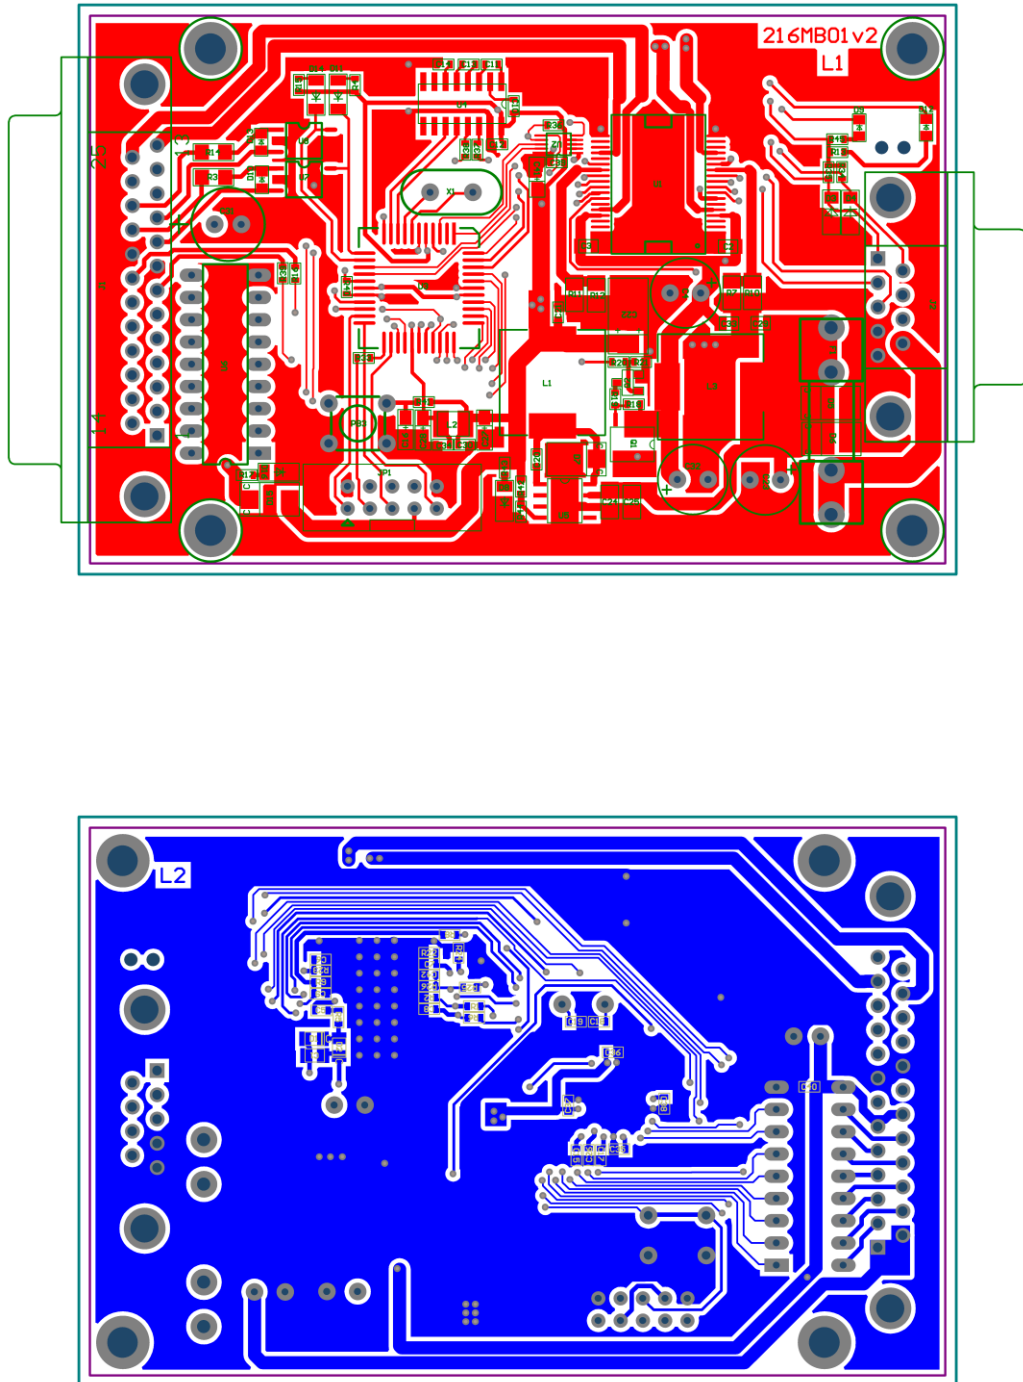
Assembly of the driver unit – top side (top) and bottom side (bottom).
